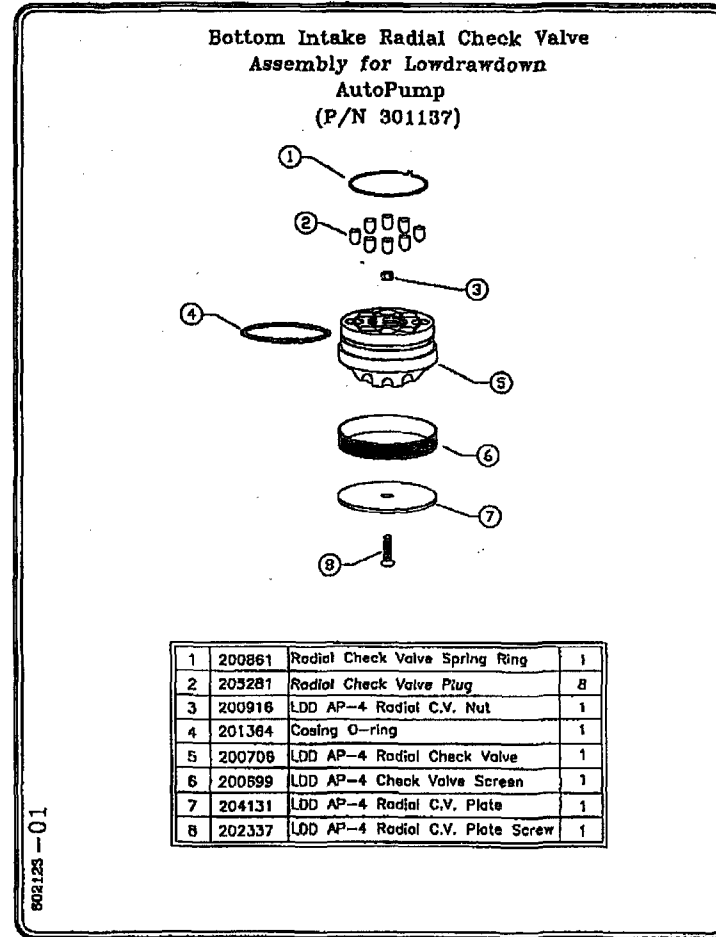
Exploded View of Bottom Intake Radial Check Valve for Low-Drawdown Pump
